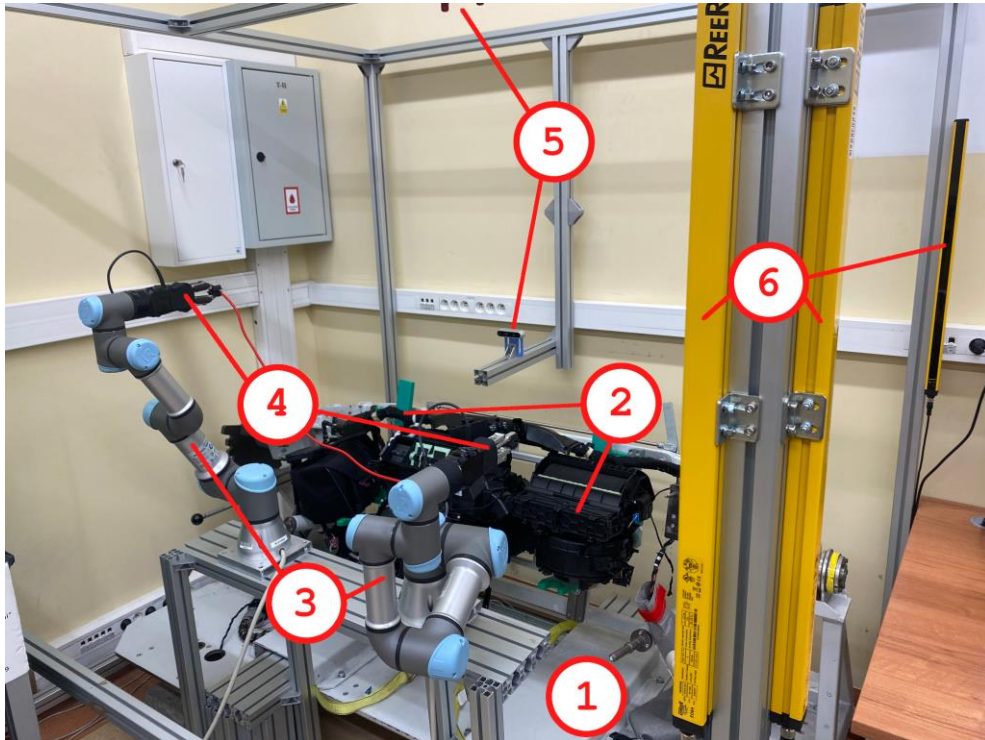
Overview of the robotic cell layout at PUT: 1. cockpit palette, 2. wiring harness, 3. UR3 manipulators, 4. RG2 grippers, 5. Intel Realsense D435 cameras, 6. safety laser curtains
